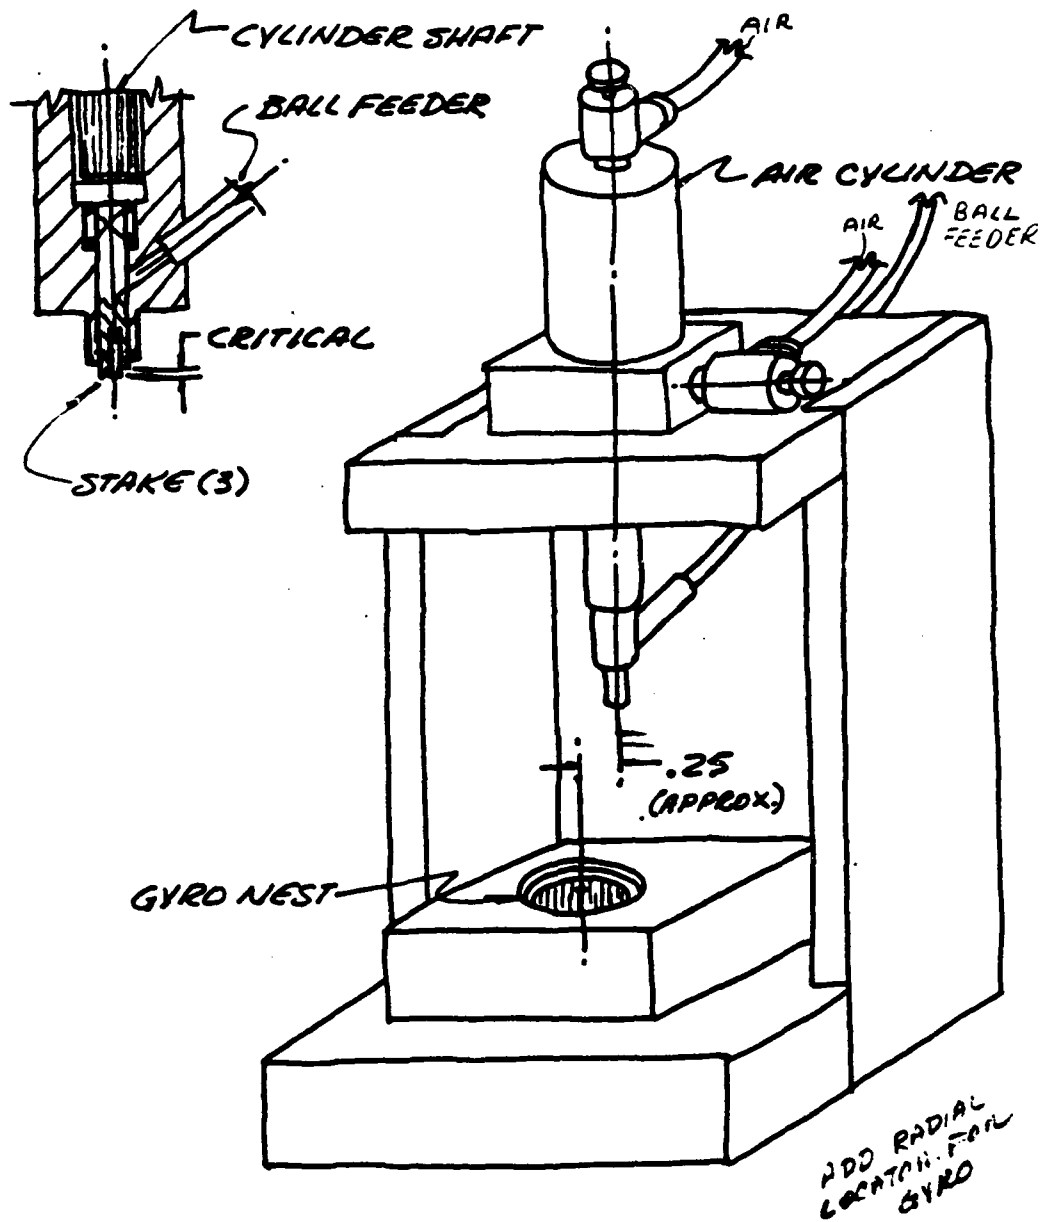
Ball Inserting/Sealing Press (Final Assembly Operation GG1111)
